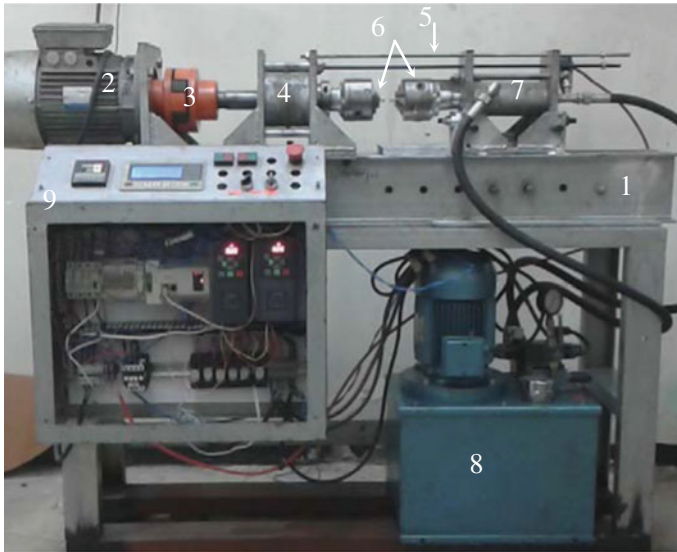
Scheme of the direct driving friction welding machine (*Designed and Fabricated in LMA of USTHB, Algiers, Algeria*): 1 Main body, 2 main driving motor with brake unit system, 3 clutch, 4 bearing collar, 5 supports, 6 chucks, 7 press, 8 hydraulic unit, 9 control unit box
